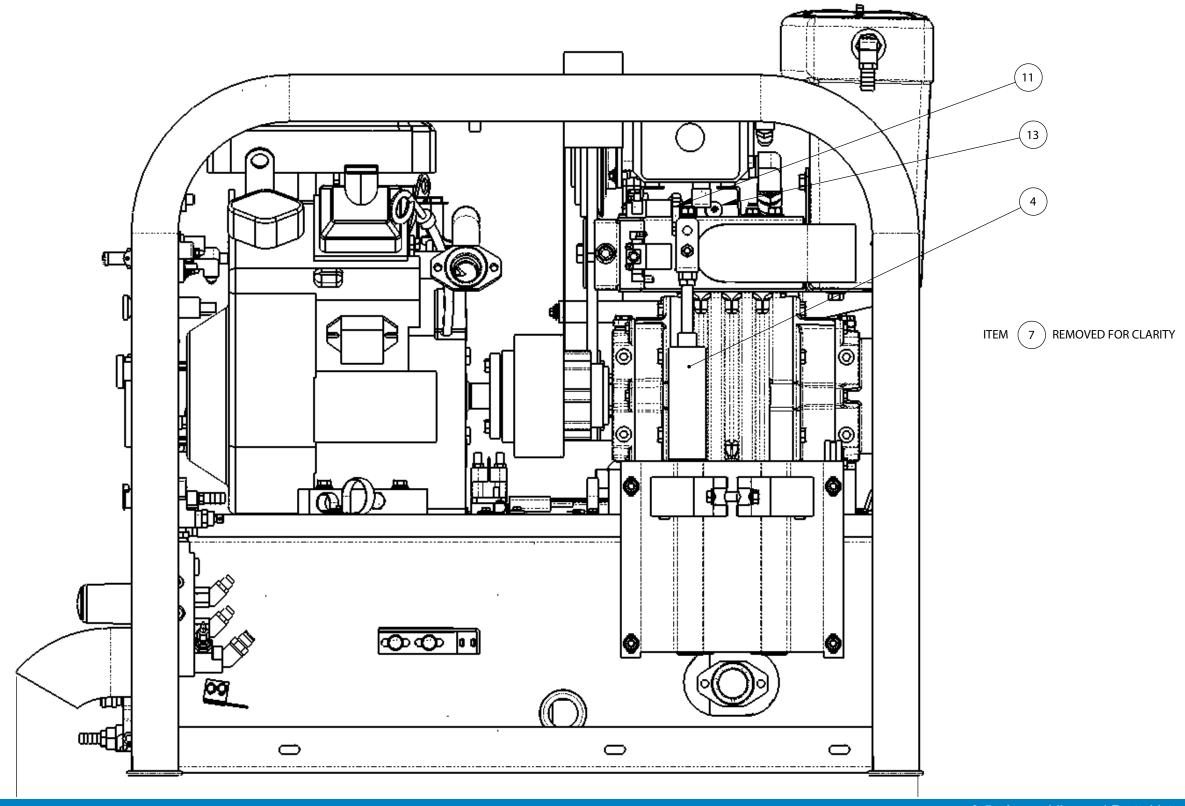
Machine Assembly - View 5 of 5 610-050-720 0
